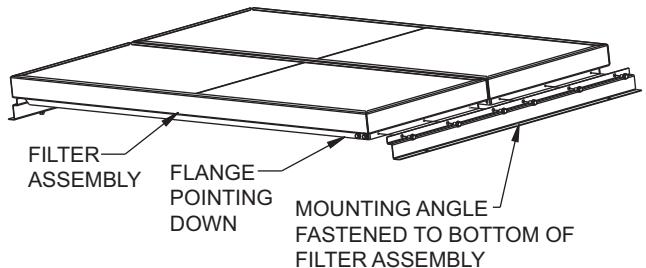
Correctly Assembled Bottom Filter Assembly, Sizes 040-060 Only
